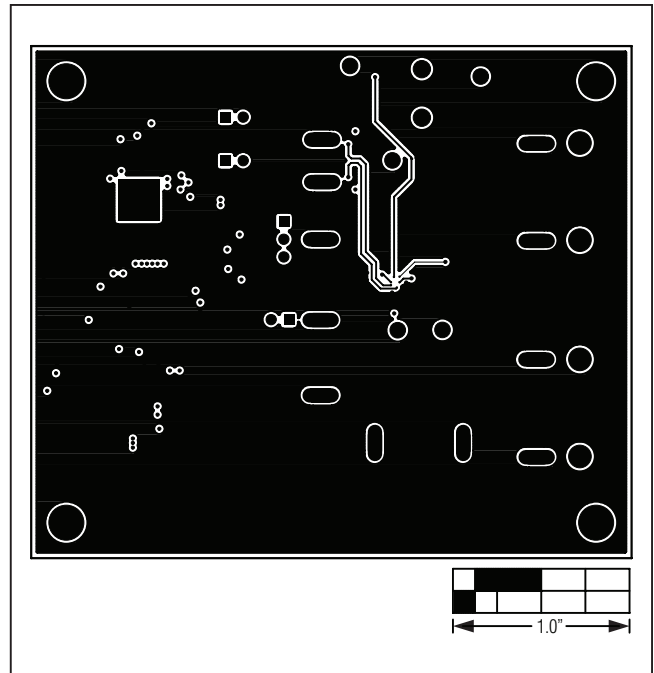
MAX97003 EV Kit PCB Layout—GND Layer 3
